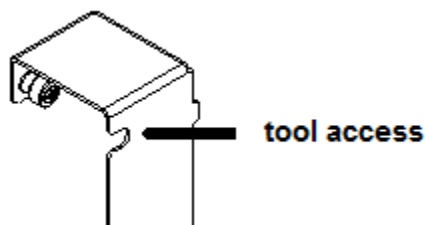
Rear Exhaust Adapter Kit (BT8A78REX)
